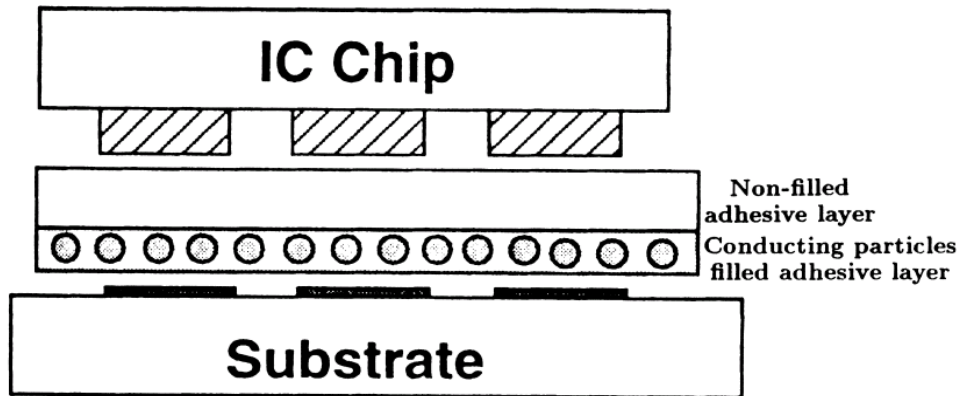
Solderless Flip Chip with Anisotropic Conductive Film (ACF) on PCB (DCA)
